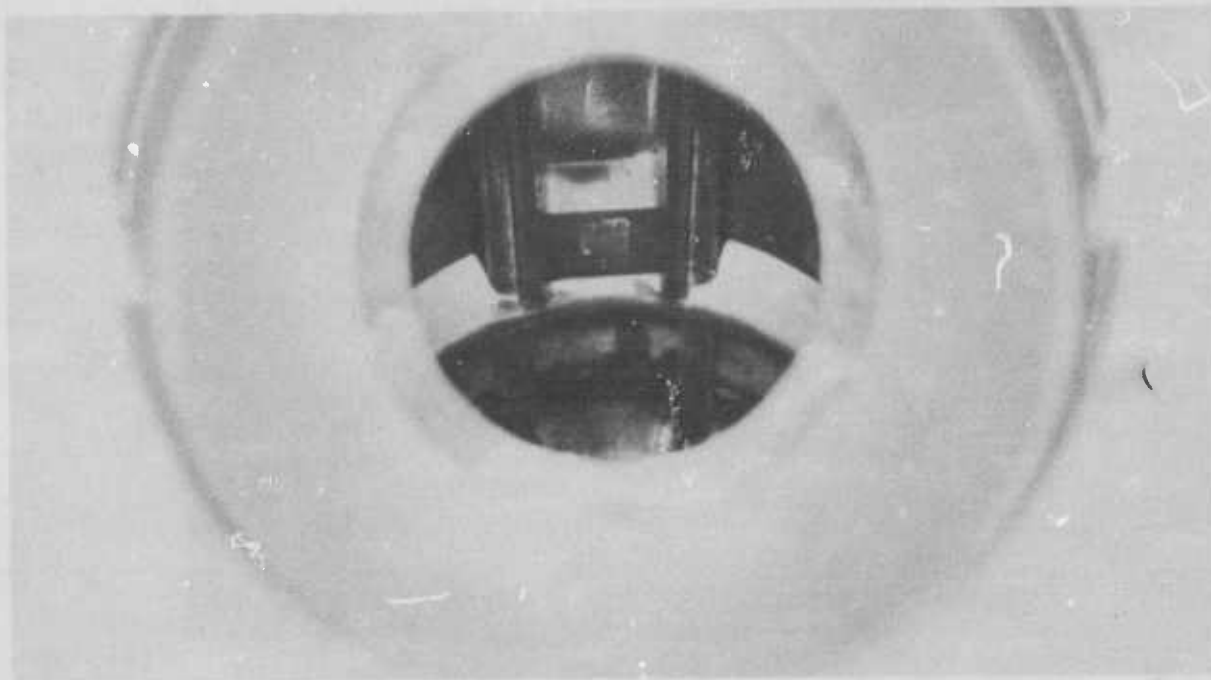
Fuel Tank Showing Internal Sway Brace Ring and Longeron.
